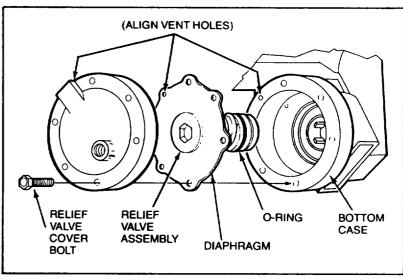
B. RELIEF VALVE ASSEMBLY FRP-II (1-1/2" ILLUSTRATED)
